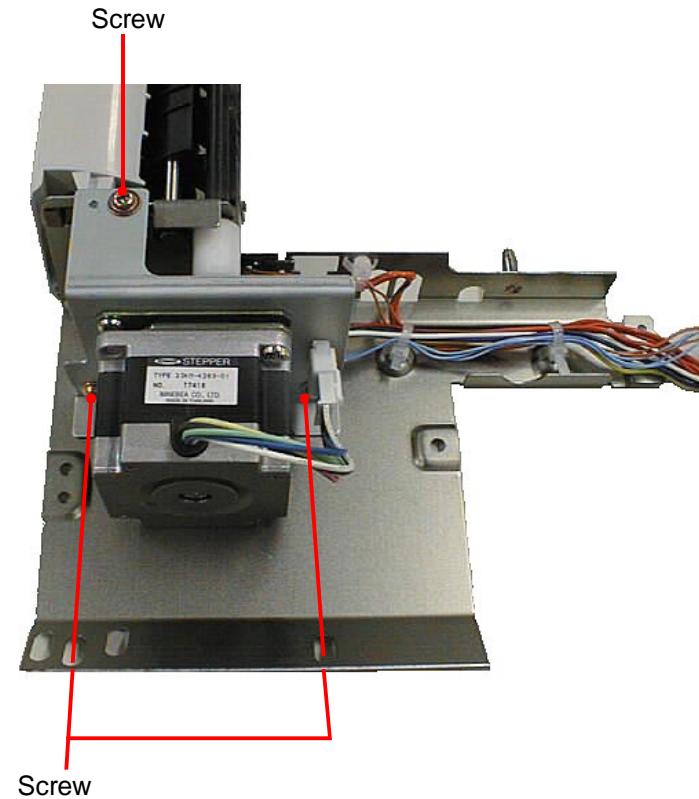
Paper Eject/Reverse Motor Unit Removal
